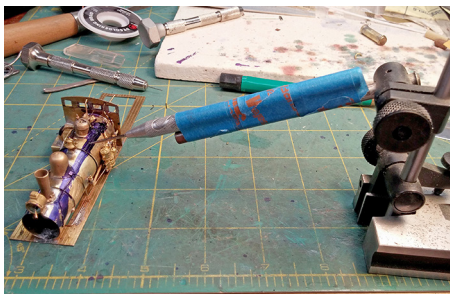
The horizontal center lines for the hand rail stanchions were marked on the boiler using a surface gauge. (Micro-Mark #60520)
